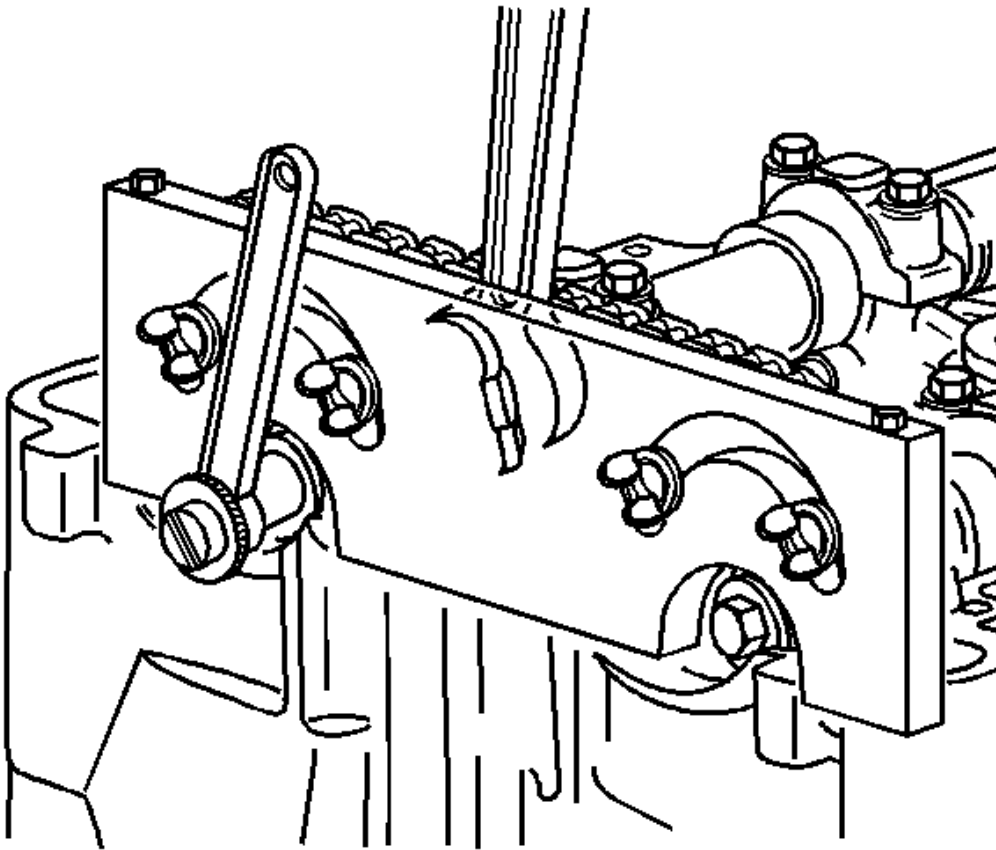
Removing/Installing Camshaft Timing Sprocket Retaining Bolts & Washers
